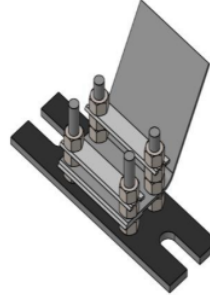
Cutting blade holder with welding fastening system.
